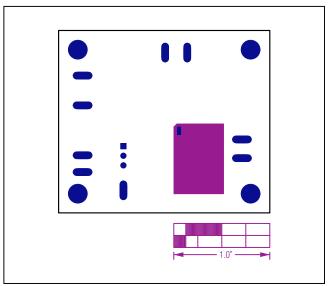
MAX17542G 3.3V Output EV Kit Component Placement Guide—Bottom Solder Mask
